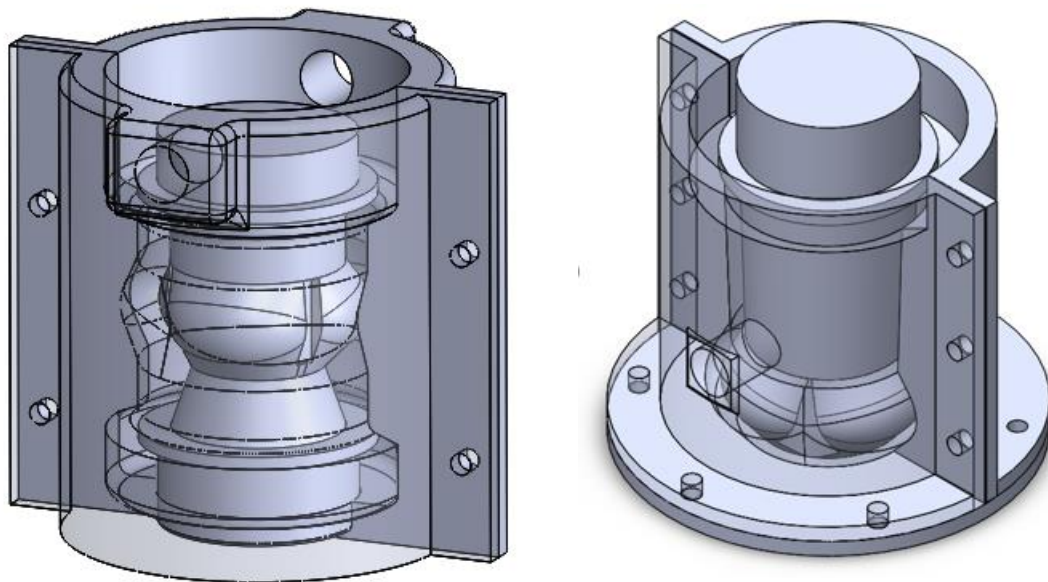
Silicon-Casting Molds. On the left the preliminary one, on the right the final one.
